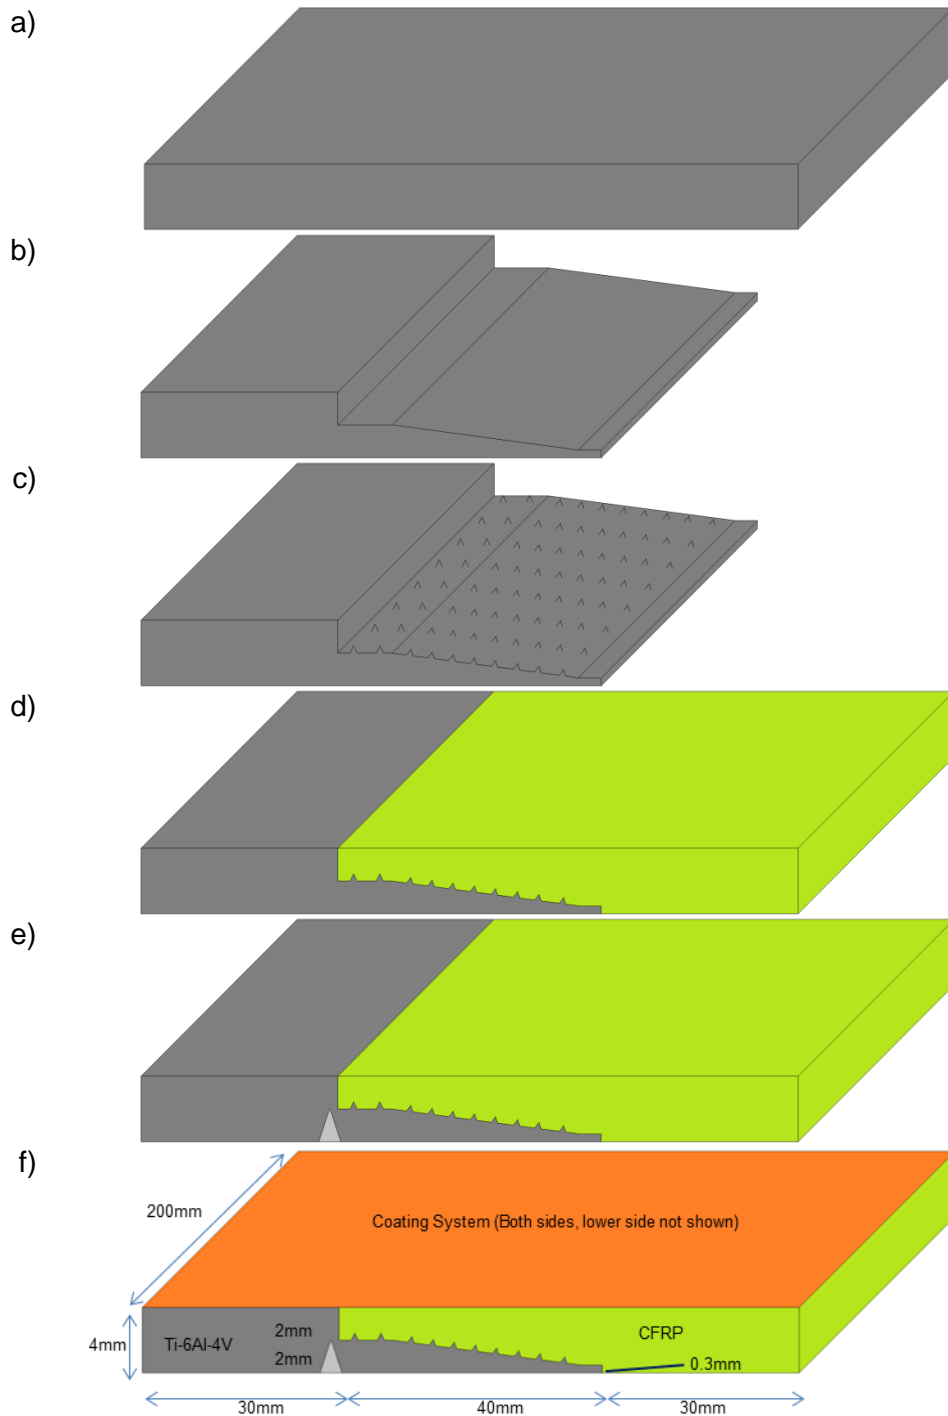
Component demonstrator: a) Preparation of initial Ti-6Al-4V sheet, b) Machining of stepped groove, geometry as shown., c) Surfisculpt® of machined surface, d) Layup and curing of CFRP, e) Laser welding in vicinity of Ti-6Al-4V to CFRP interface, f) Application of surface protection system to both sides.. Diagrams are not to scale.
